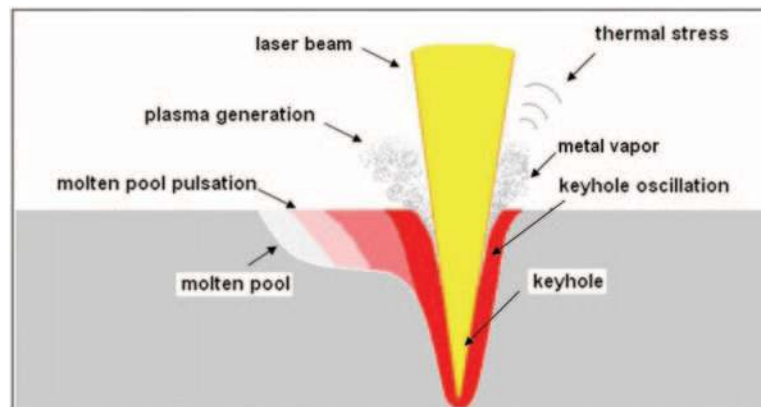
Mechanisms of sound pressure generation during laser welding
